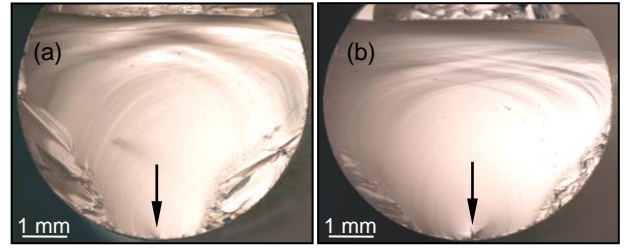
Representative fracture surfaces relating to: (a) novel, and (b) conventional processes.
